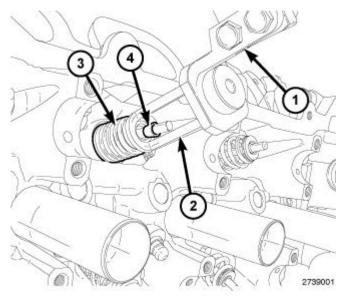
Compressing Valve Spring & Locating Valve Retaining Locks Courtesy of CHRYSLER GROUP, LLC
